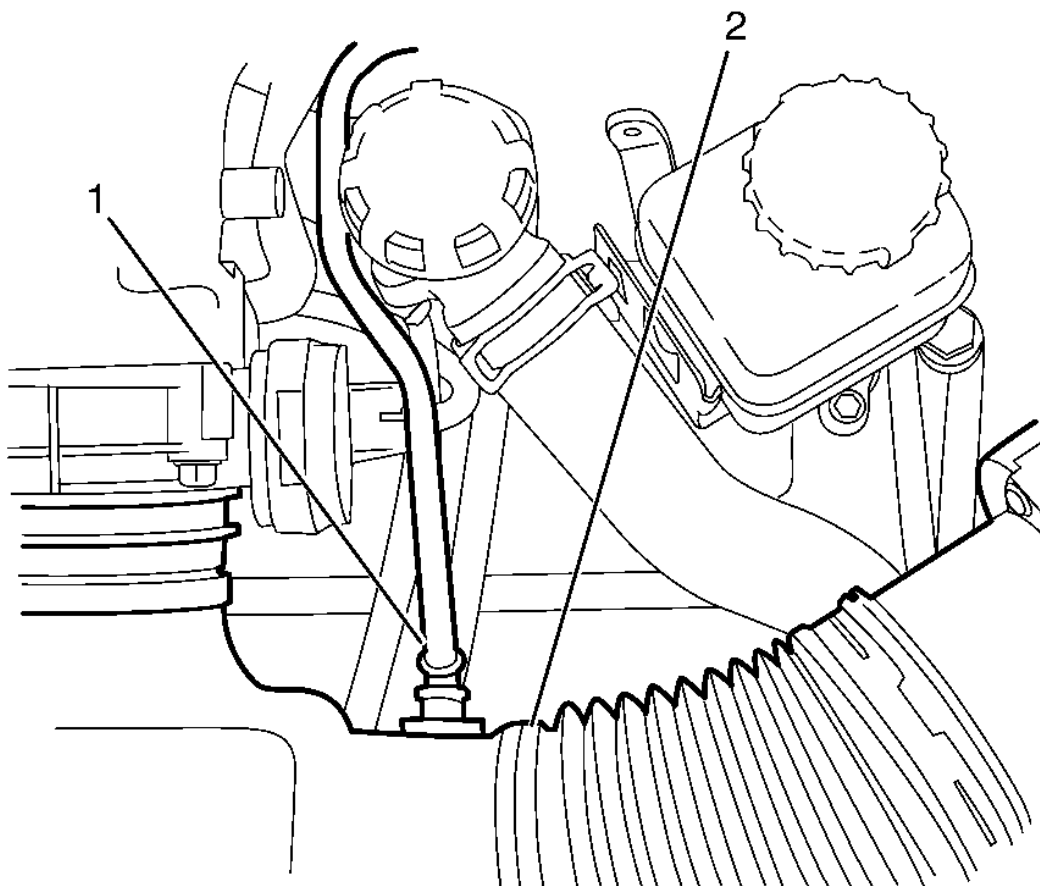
Identifying PCV Tube & Air Intake Assembly
